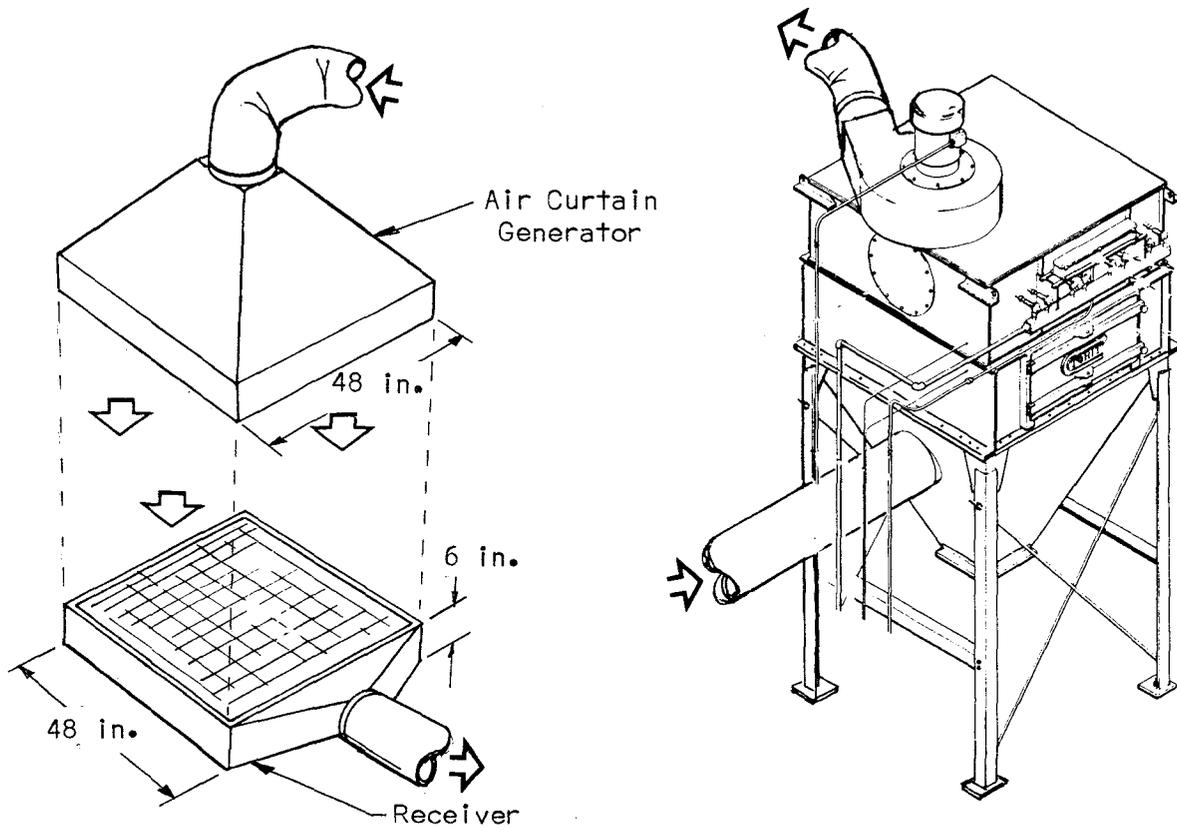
Air Curtain System With Remote Air Cleaner/Blower Package and Optional Receiver
